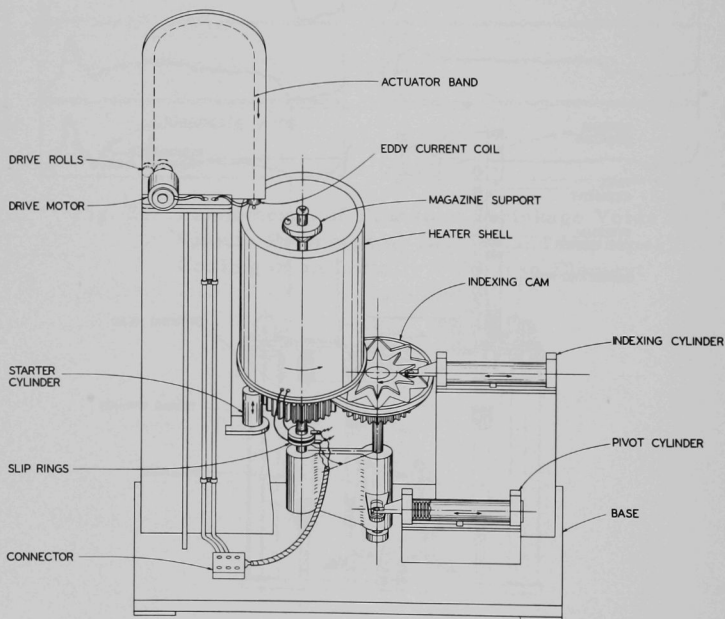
Fuel-element Sodium-bond-inspection Machine for remote-controlled Operation in EBR-II Fuel Cycle Facility
